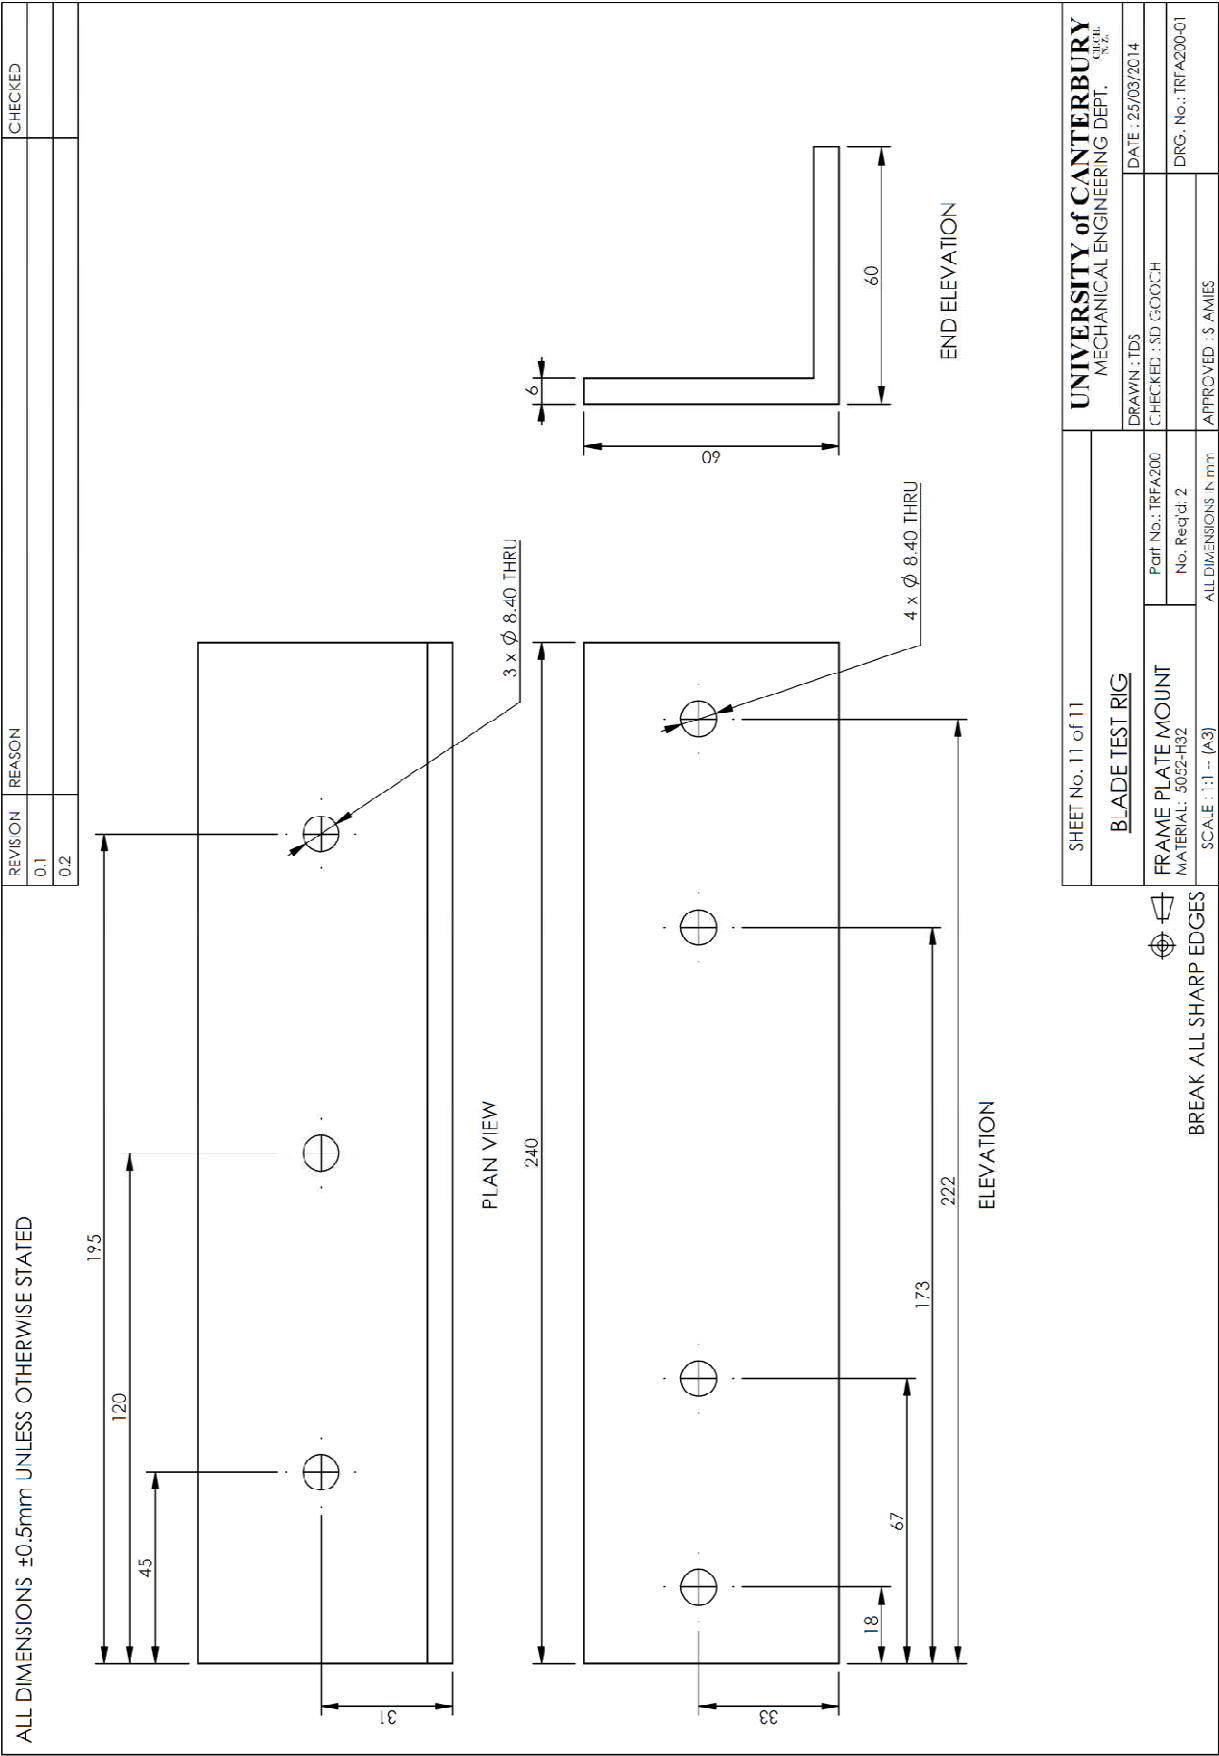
Manufacturing drawing of frame plate mounts in fatigue test rig.
